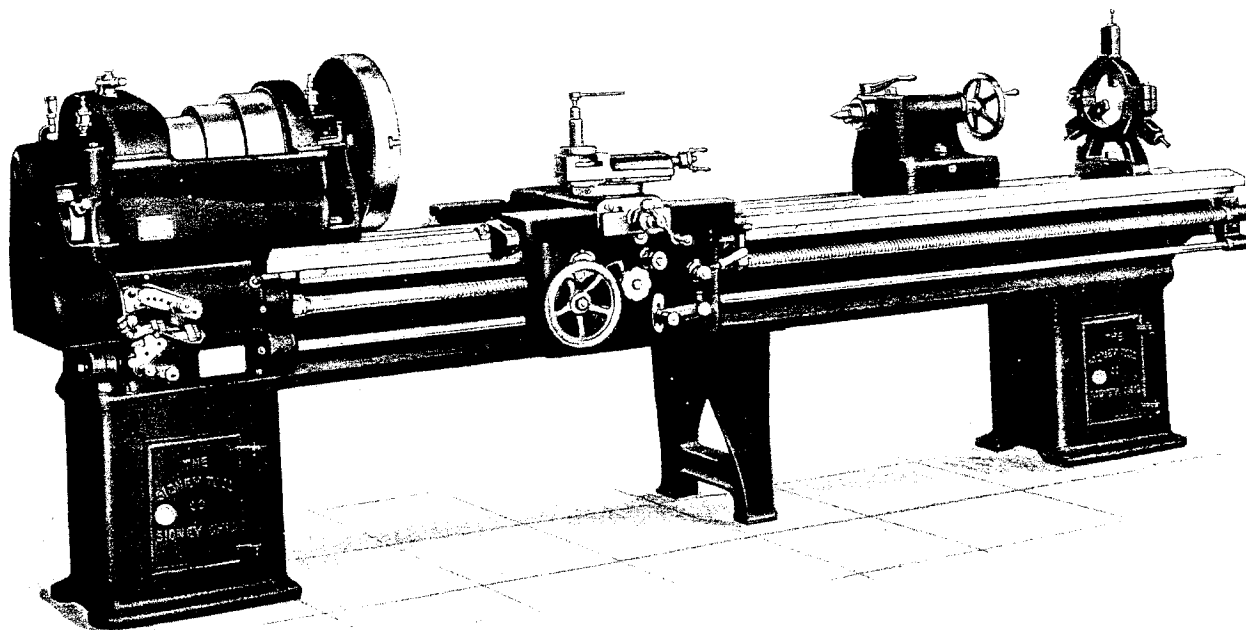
19" x 12' Sidney Heavy Pattern Quick Change Gear Engine Lathe.
